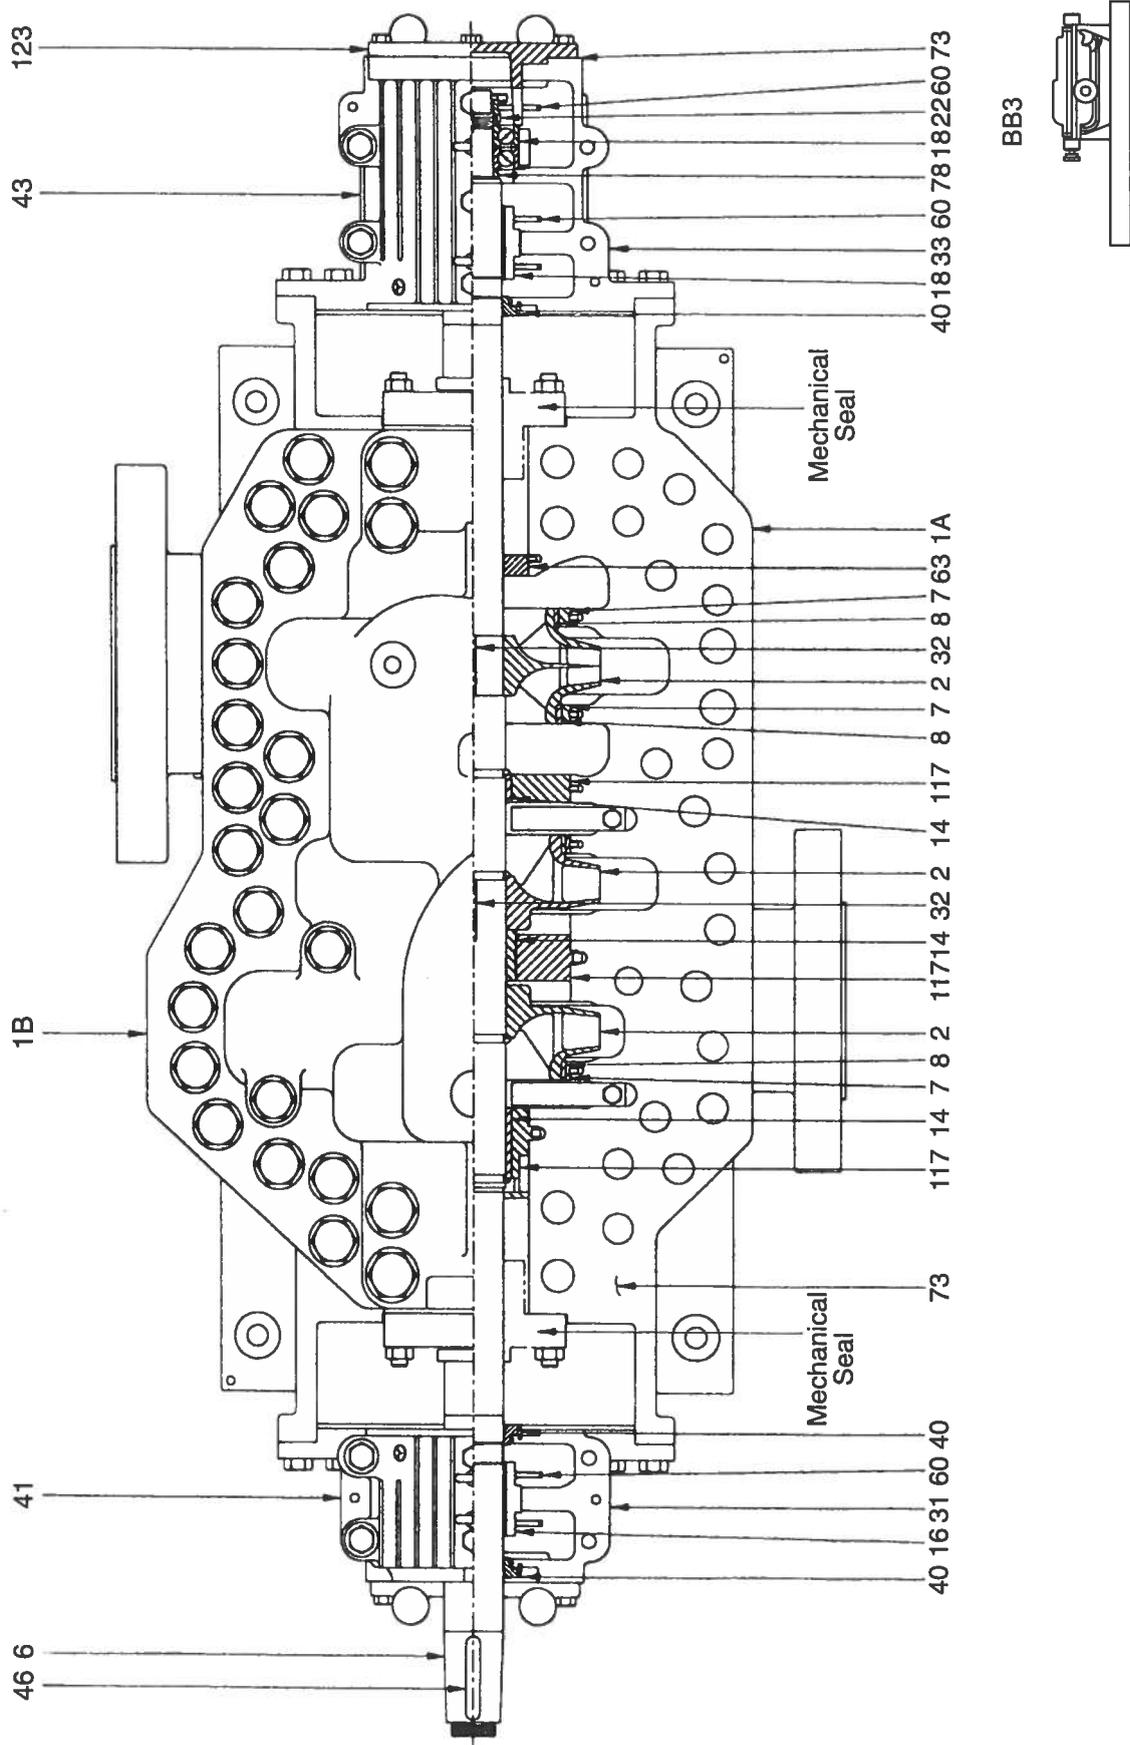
Impeller between bearings – flexibly coupled – multistage – axial (horizontal) split case
